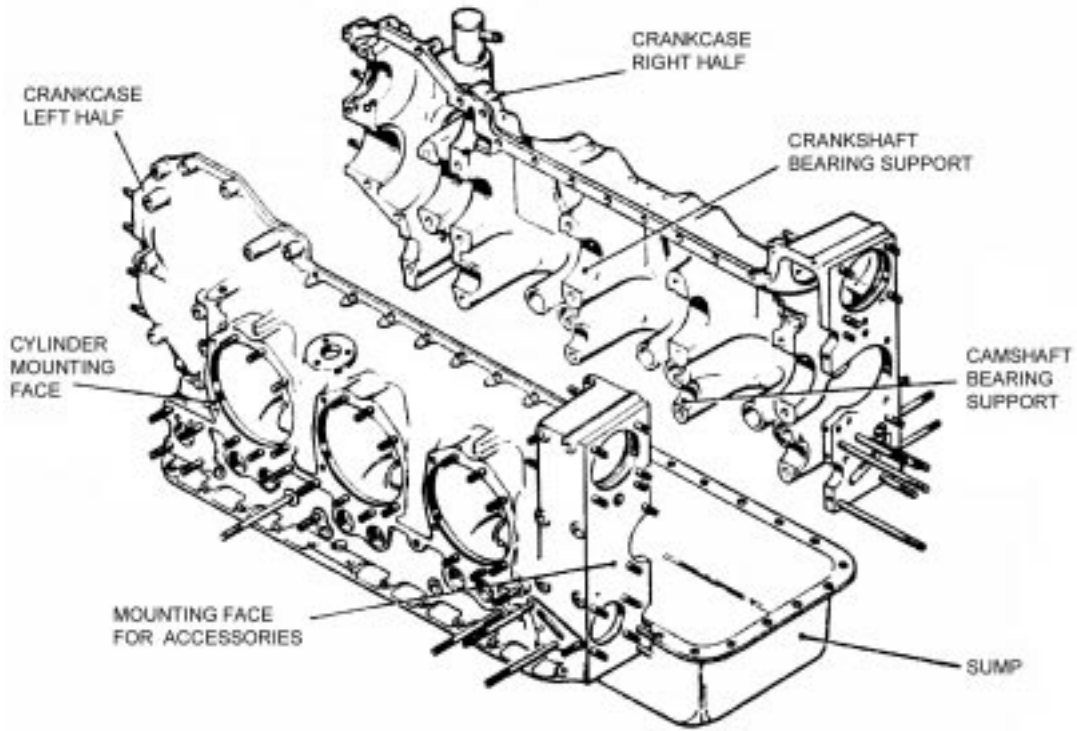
Crankcase and Sump Of Horizontally Opposed Engine.
